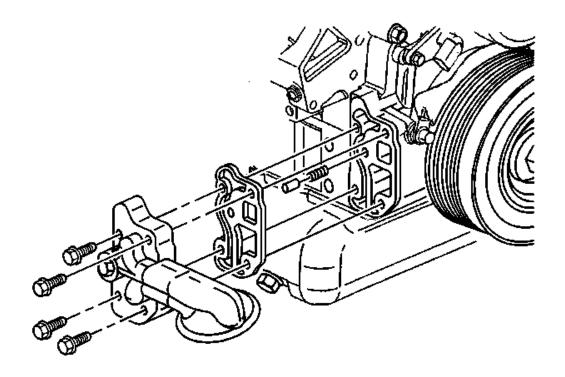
Engine Front Cover Gasket Courtesy of GENERAL MOTORS CORP.
